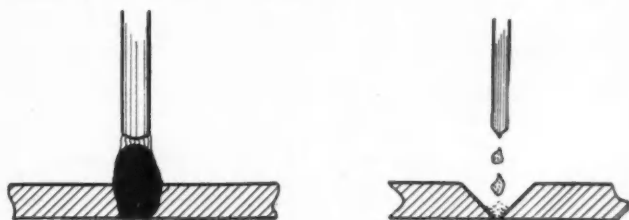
In carbon electrode welding, a filler rod of mild steel is placed along the seam prior to welding, to supply additional metal to reinforce the weld. In metallic electrode welding, the metal to form the weld is added, drop by drop, from the electrode itself.
